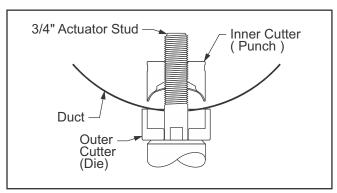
1-7/8" Hydraulic Punch Configuration
